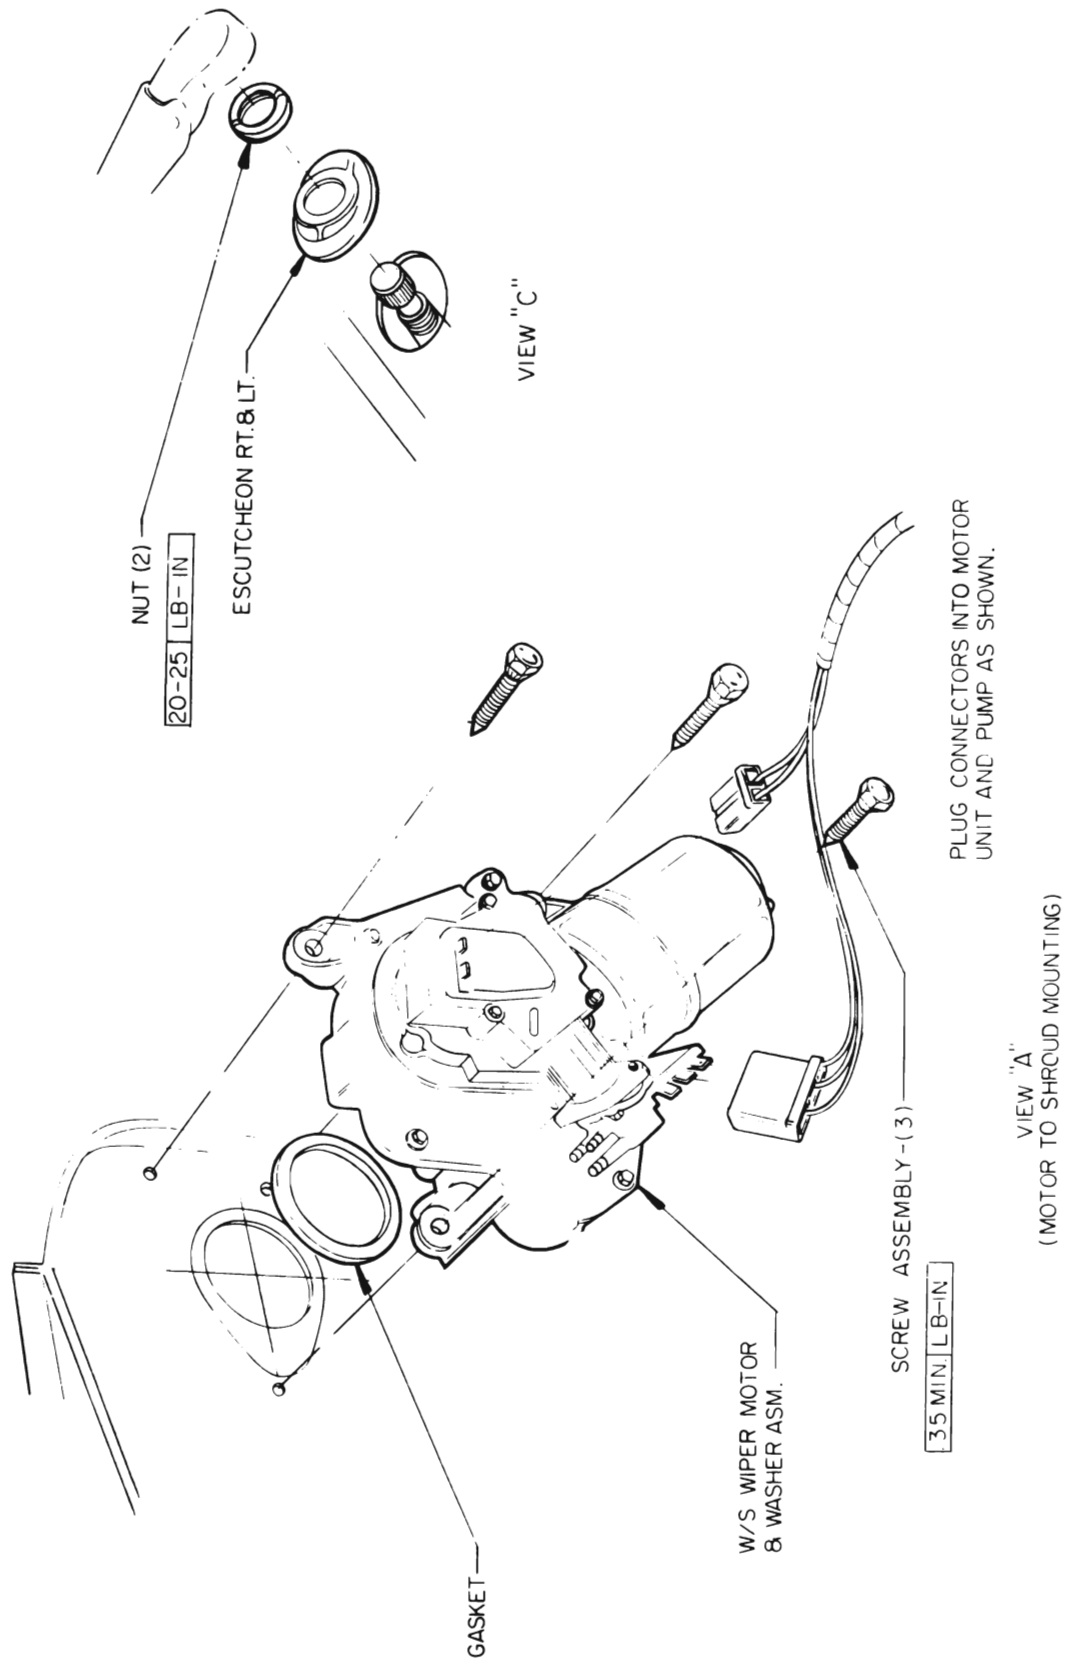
Windshield Wiper Motor Installation - Riviera
